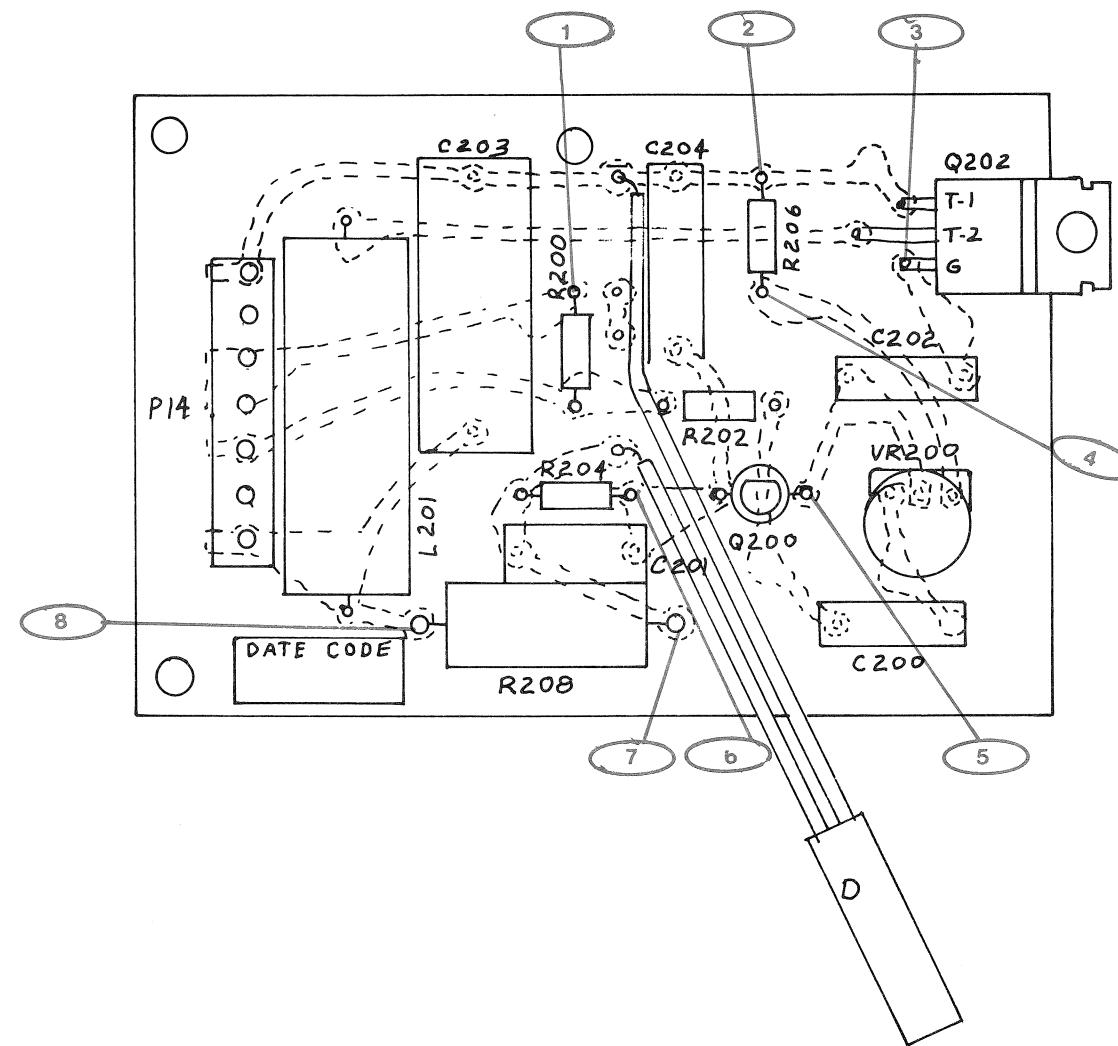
LAMP REGULATOR BOARD ASSEMBLY, (Model 3130)
